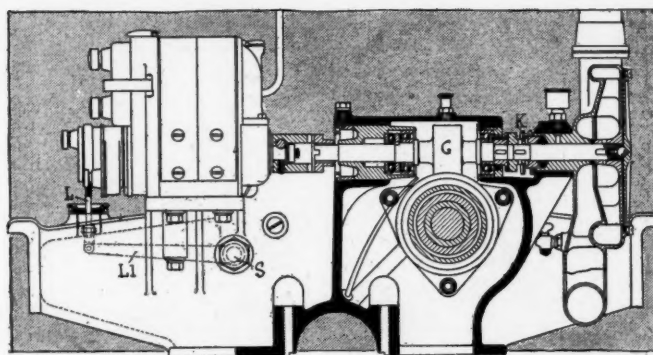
Ball bearing magneto and pump drive used in Fiat cars
